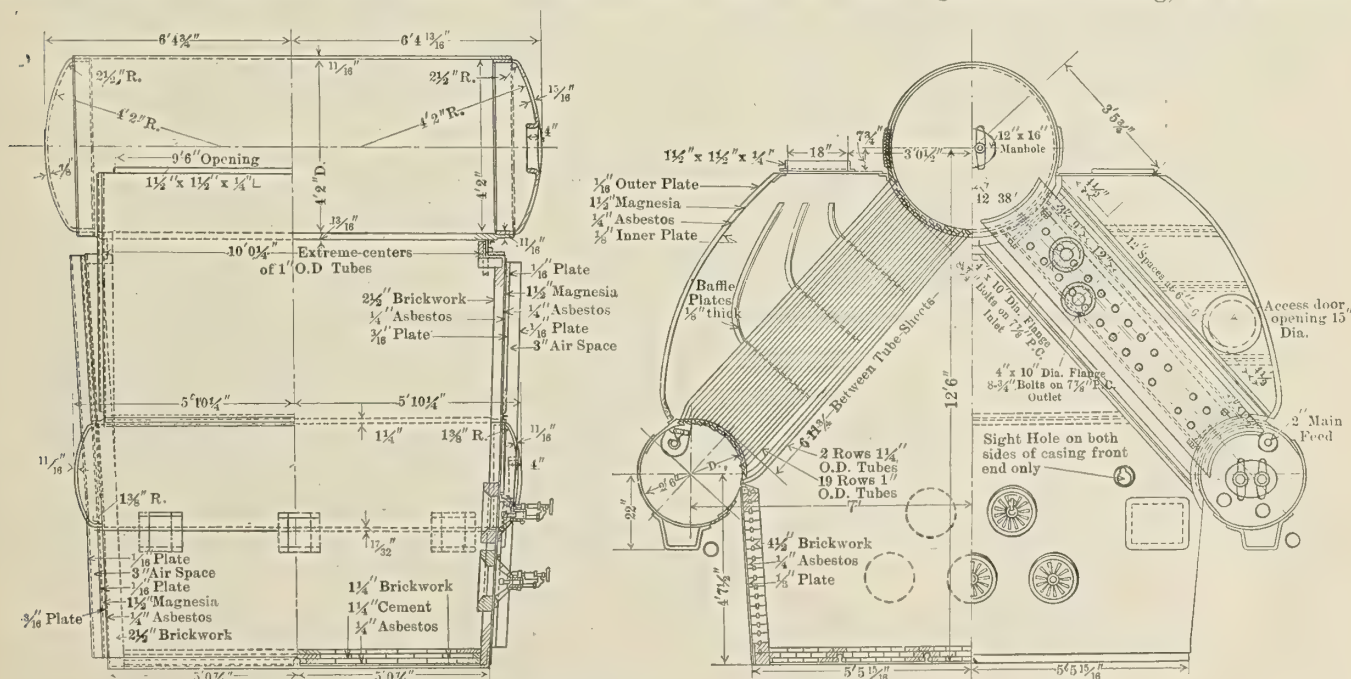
Arrangement of Yarrow Boiler Built by Bethlehem Shipbuilding Corporation
